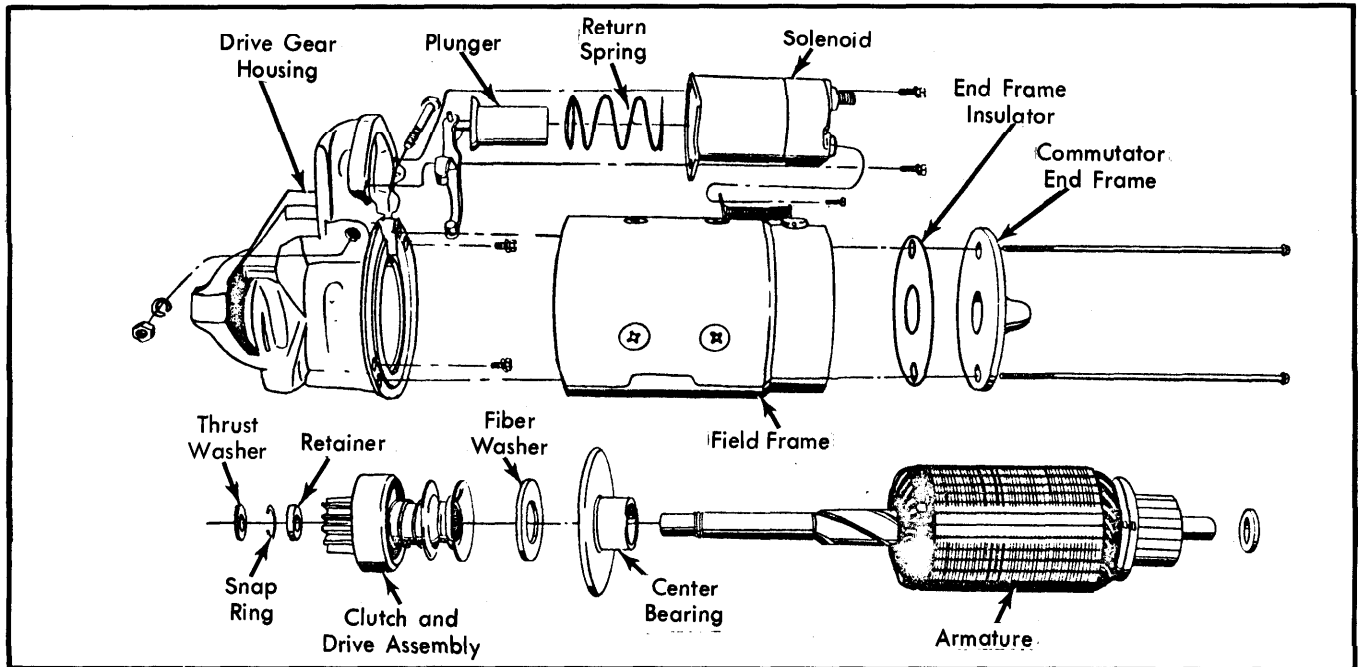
Exploded View of Delco-Remy Diesel Starter Motor Assembly (20MT, 25MT & 27MT)
